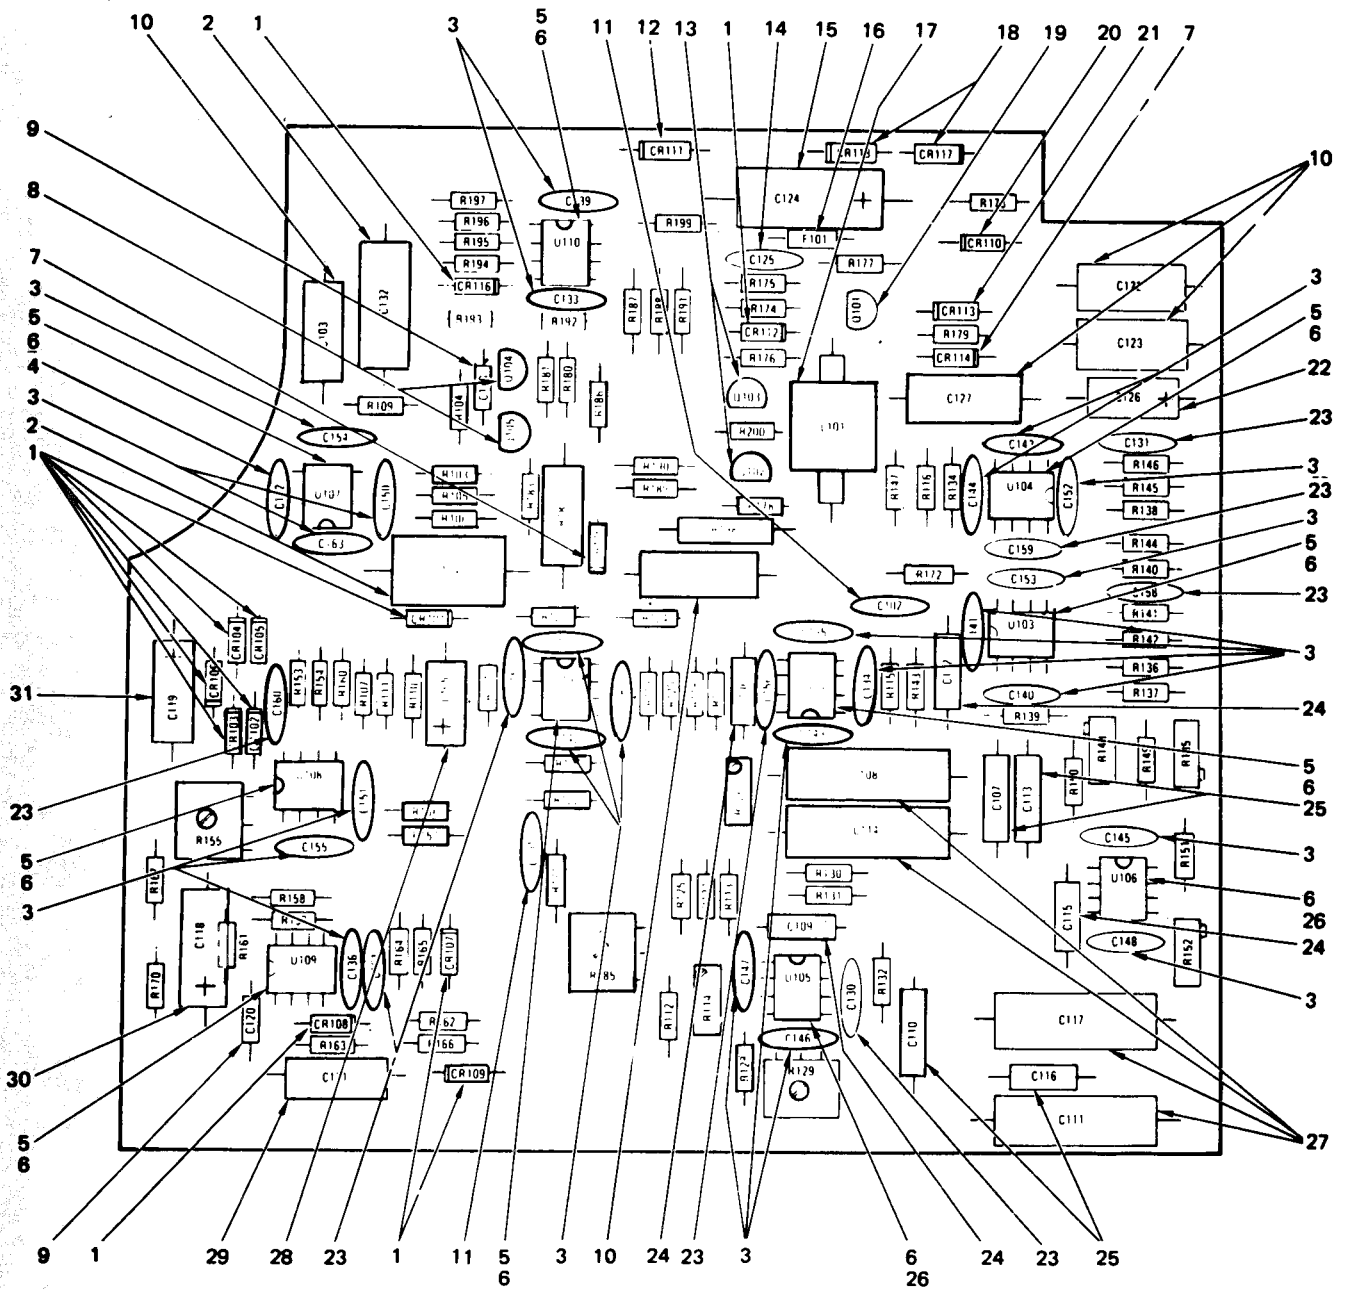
Balancer Circuit Card Assembly (Sheet 1 of 2)
